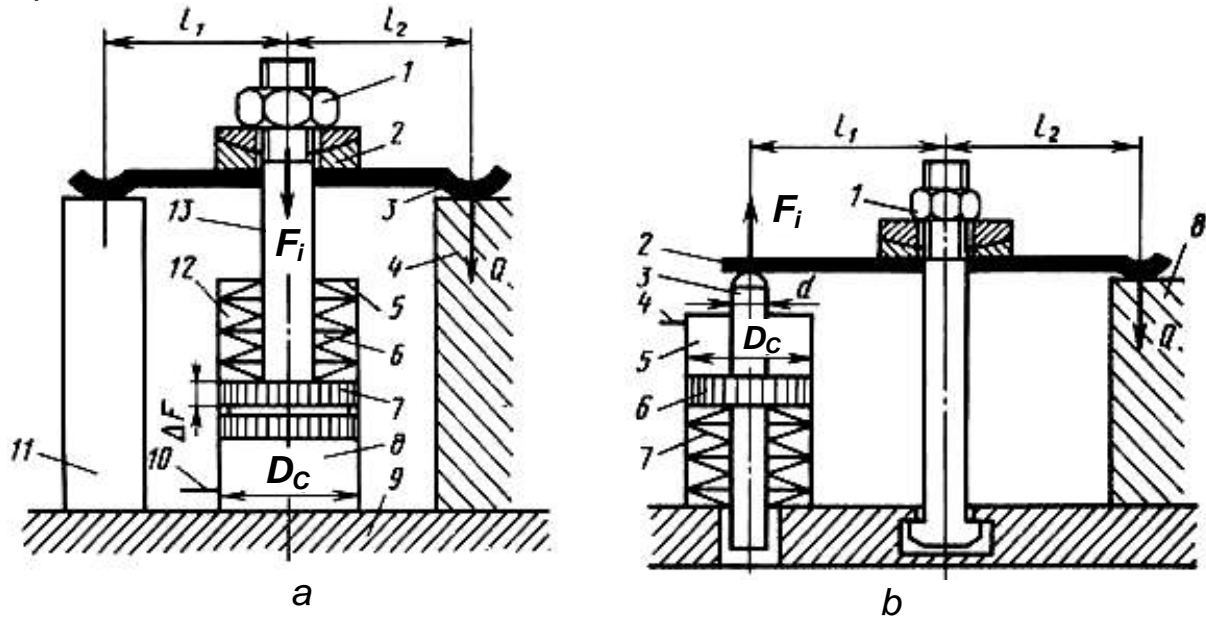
Diagrams of spring-hydraulic clamping devices with pull (a) and push (b) cylinders
